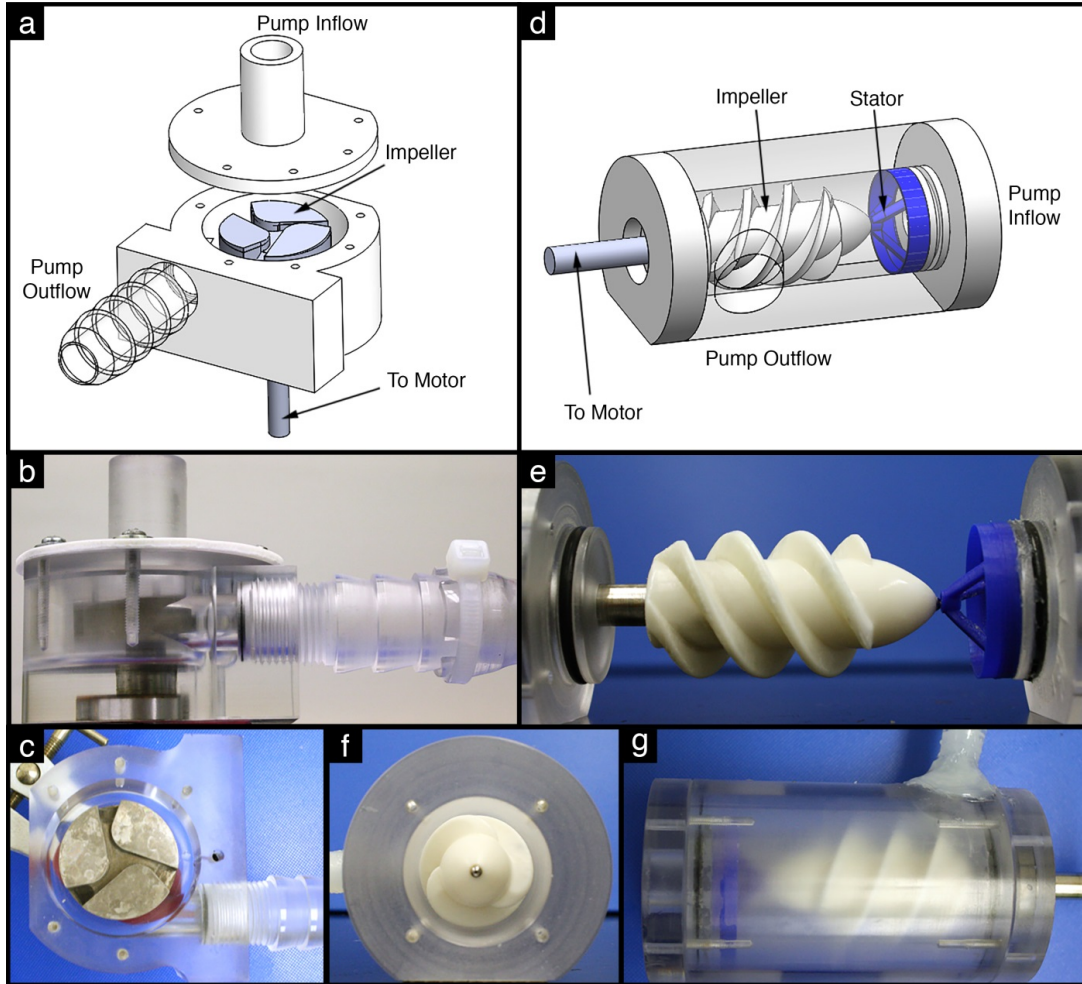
Mock-VADs designed in SOLIDWORKS. The impeller in each design was connected to an external motor through a rotating seal. A) Centrifugal flow pump design diagram. B) Front view of centrifugal flow device. C) Top view of centrifugal flow device with inflow removed. D) Axial flow design. E) Impeller/stator interface of axial flow device with outer casing removed. F) Lateral view of axial flow device with stator removed (inflow view). G) Top view of axial flow device with inflow on left.
